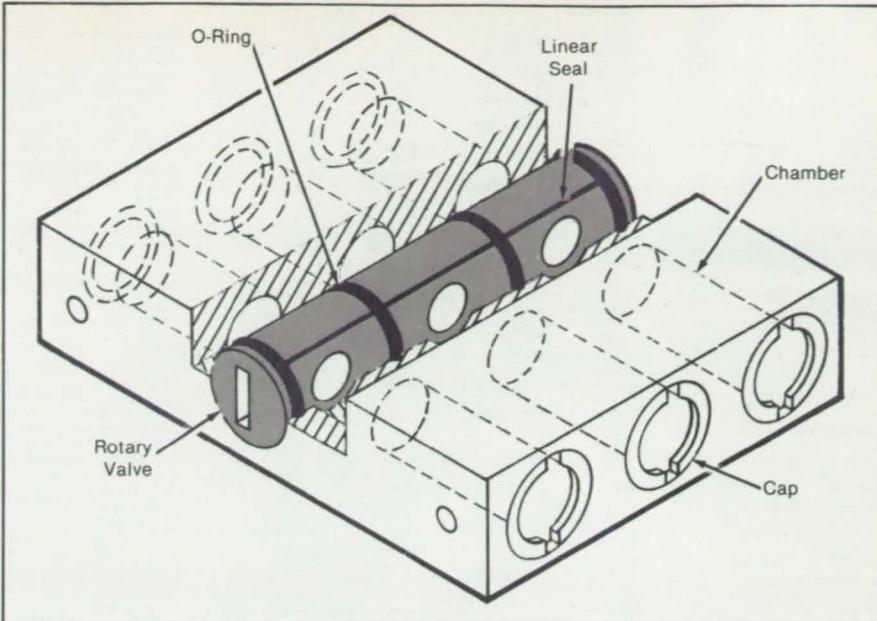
Openings in a Cylindrical Rotary Valve connect chambers to each other selectively through internal passages. O-ring and strip seals prevent leakage over the valve surface. Caps on the chambers seal them tightly but are removable for the addition of reactants or withdrawal of reaction products.
